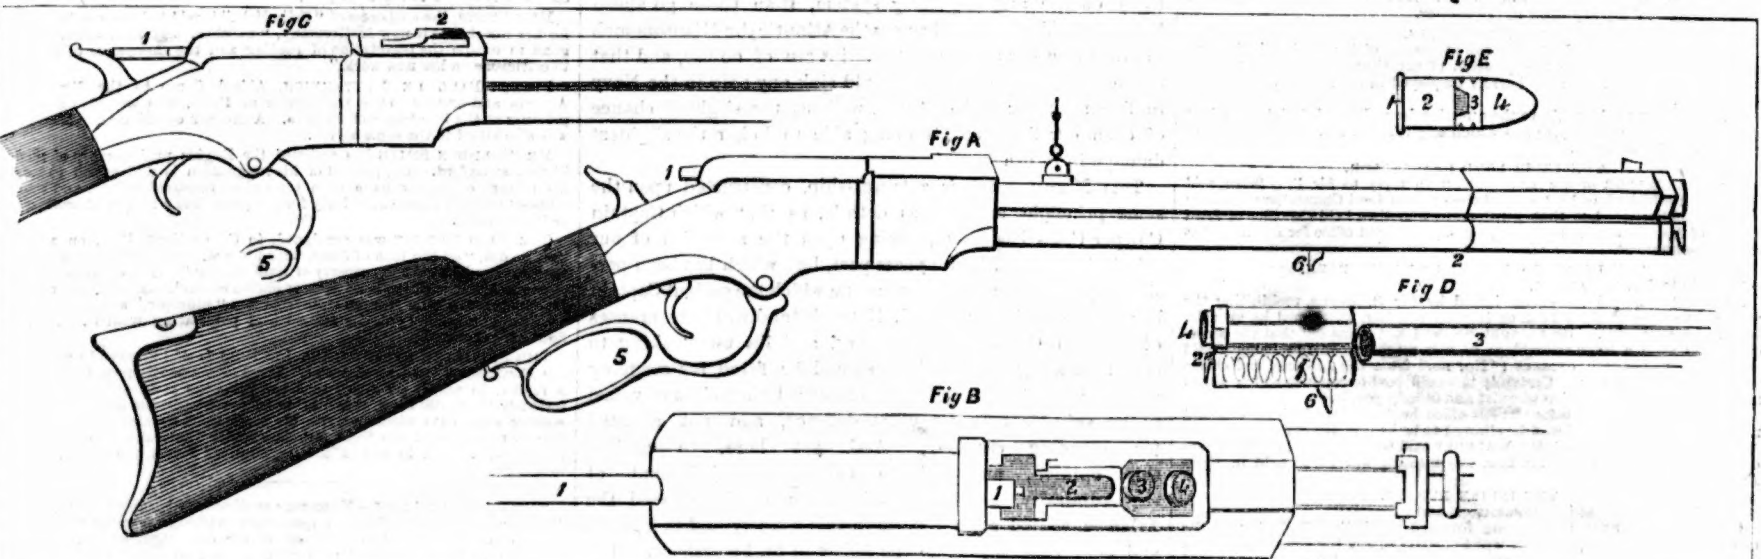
Fig. A.—Rifle ready to be discharged. The hammer is projected on to rod marked 1; that strikes on cartridge charged with detonating powder, and produces explosion; 5. Lever-handle that shifts the cartridge; 6. Spring catch that works up and down back of barrel, pressing cartridge into place; 7. where barrel slides round, as shown in fig. D.—Fig. B is looking into breech from top of barrel. 1 is rod that pushes cartridge into its place, and afterwards explodes it when struck by hammer; 3 is the bottom of the breech that lifts up cartridge from lower barrel (3) on to the level of top barrel (4); the cartridge is then pushed into upper barrel by rod 1.—Fig. C.—1. Rod drawn back by the lever (5), which, being pulled forward, allows the bottom of the breech to bring up the cartridge, as shown in fig. B, marked 2; the sides of the tray are shown above the breech.—Fig. D.—1. Upper portion of the under barrel that contains whole of spring when preparing to load; 3. Pivot-rod on which the barrel turns round, enabling the cartridge to drop into it; 3. Lower part of under barrel into which the cartridge is inserted, with a slit down it to allow the spring-catch to pass down it; 4. Barrel proper; 6. Catch of spring that presses the cartridge down barrel (3).—Fig. E.—Cartridge; 2. Detonating powder; 3. Hollow of ball; 4. Ball itself.
